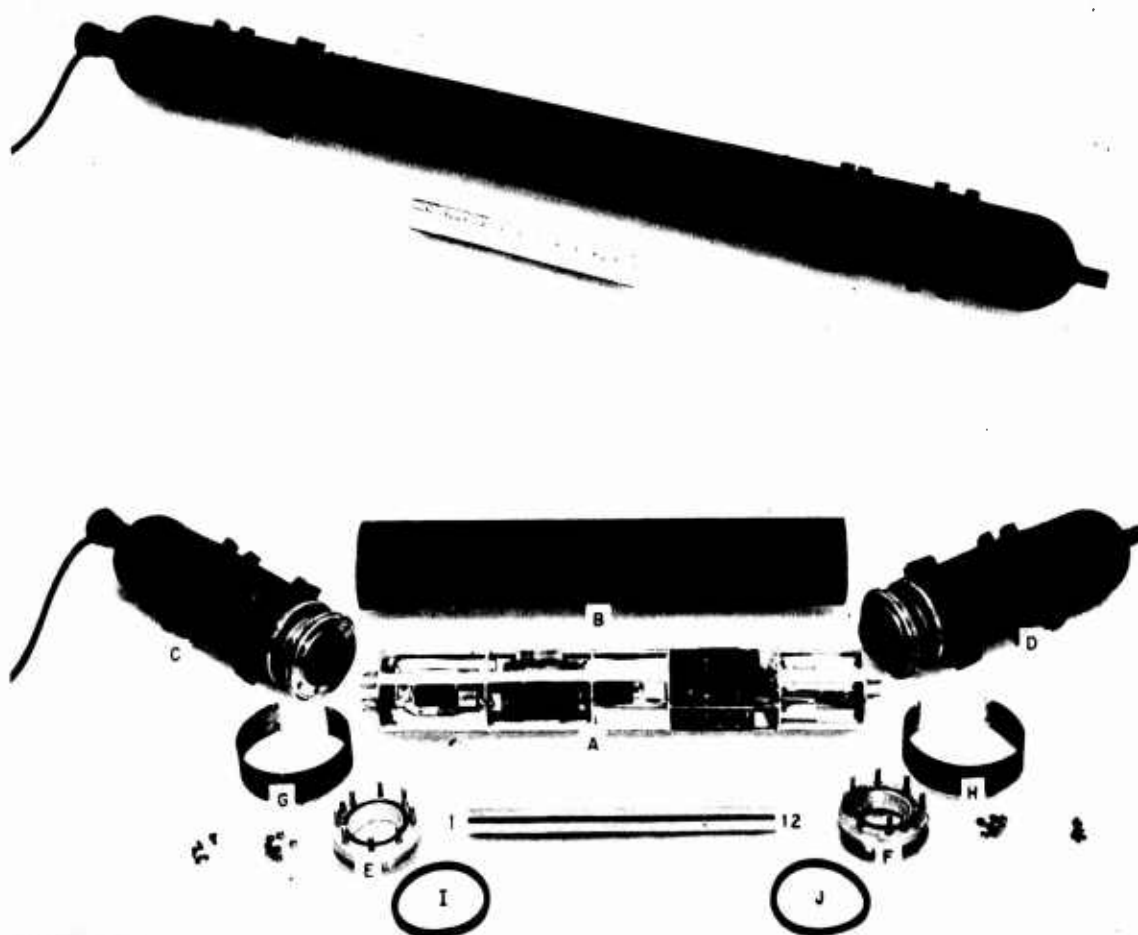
Low frequency "gas-pipe" echo repeater assembly.
